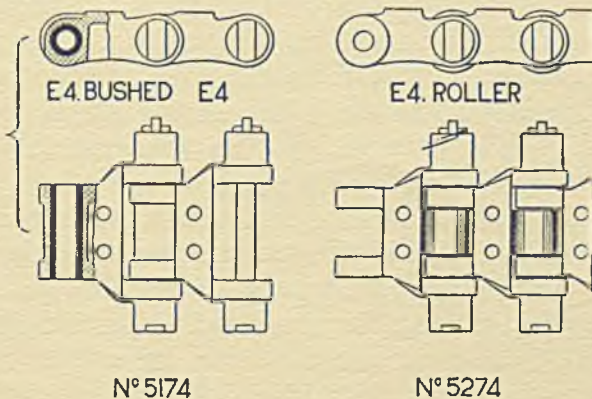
Ley's Bushed and Roller Carrier Chains.
